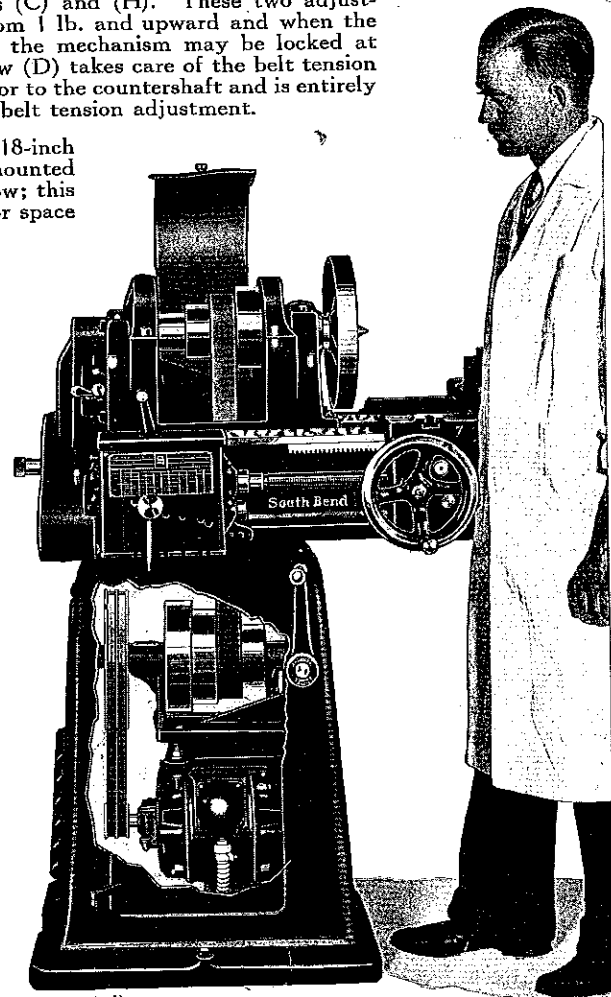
Front view of 13" lathe with door cut away, showing arrangement of driving mechanism
